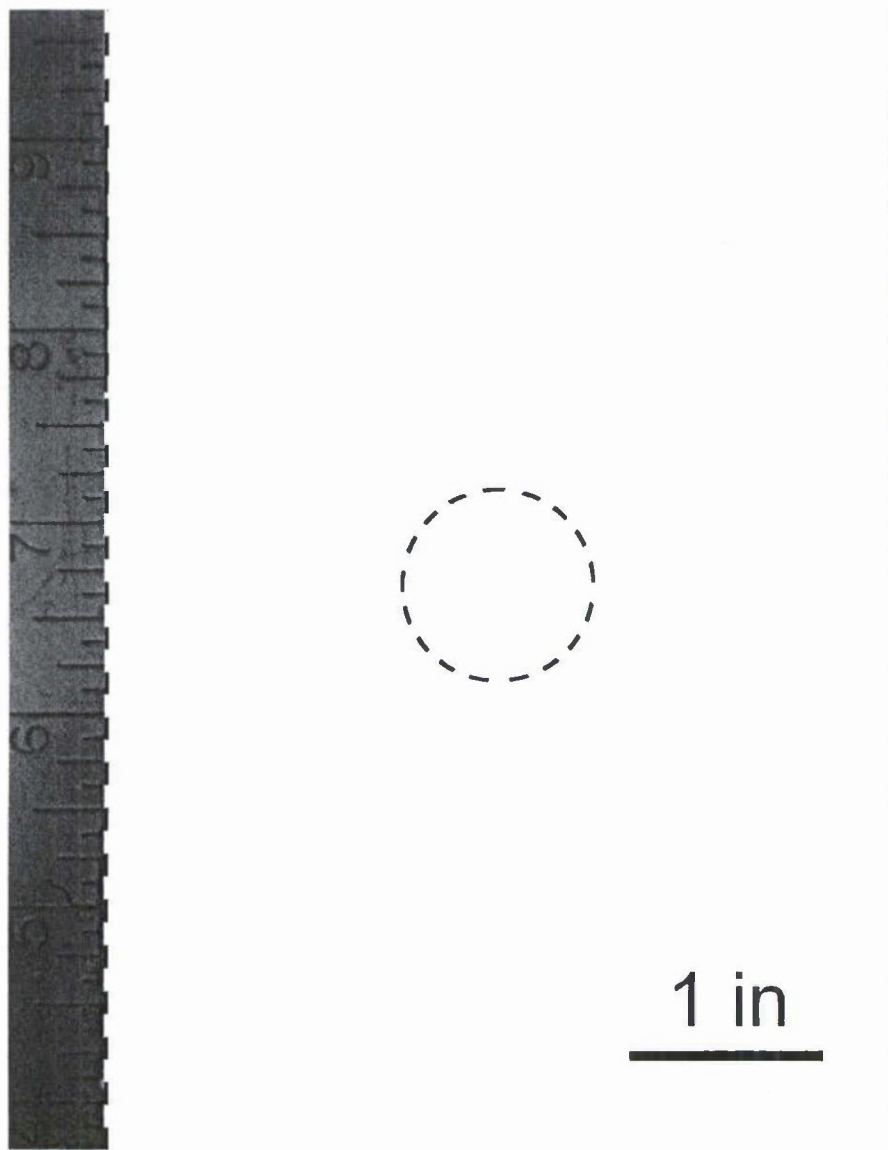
Illustration of "joining template" for open-hole specimen with hole diameter of 1.0 inches.
